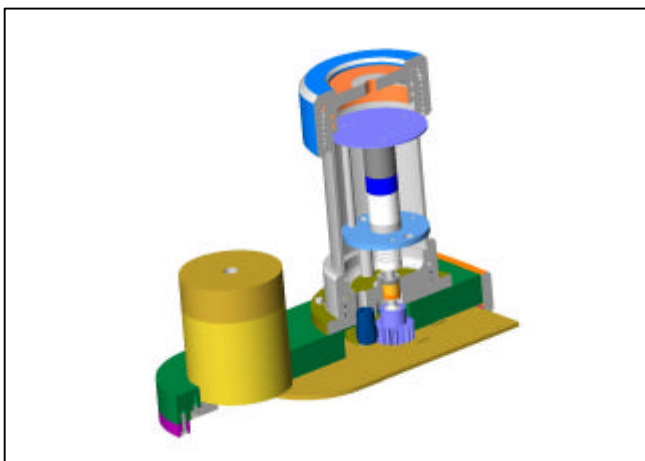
Mechanical Cross Section showing the open copper plate, small optical instrument and inner workings of the shutter mechanism.
